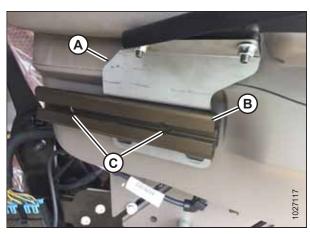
Side View of Seat with Supports Installed in Preferred Location
